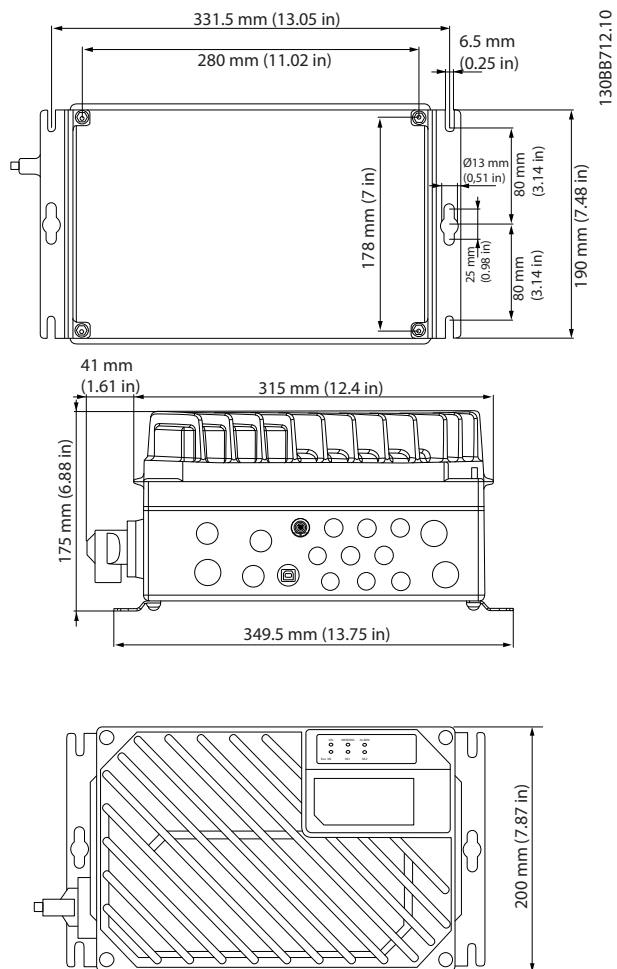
Cable Entries and Hole Sizes (Small Unit)
